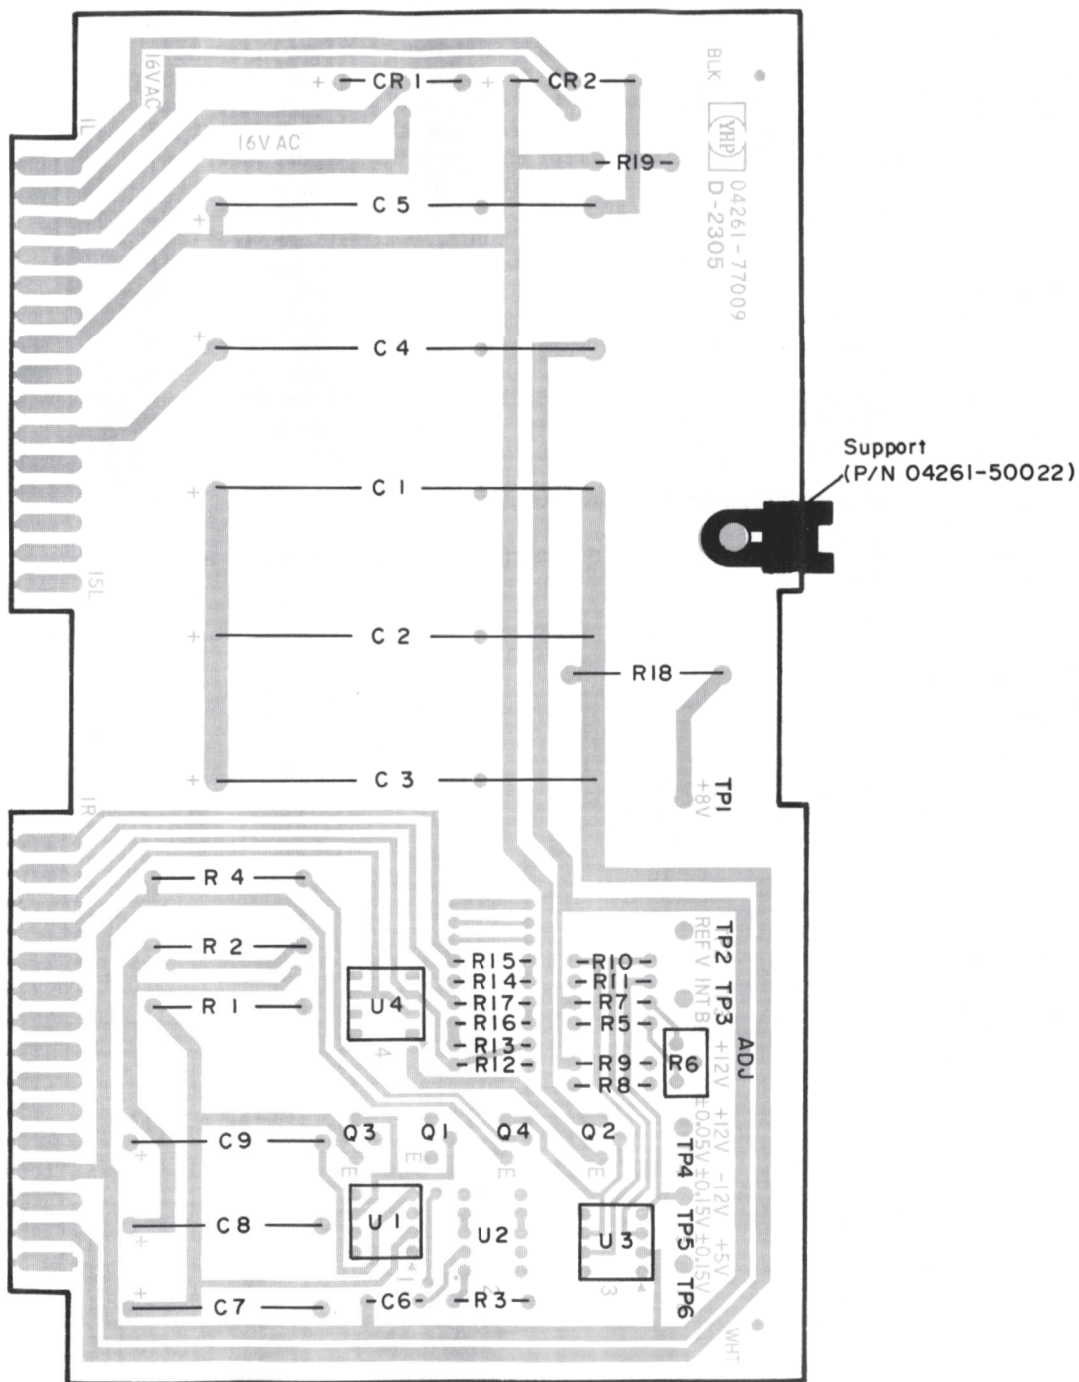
A9 Power Supply Board Assembly Component Locations.
